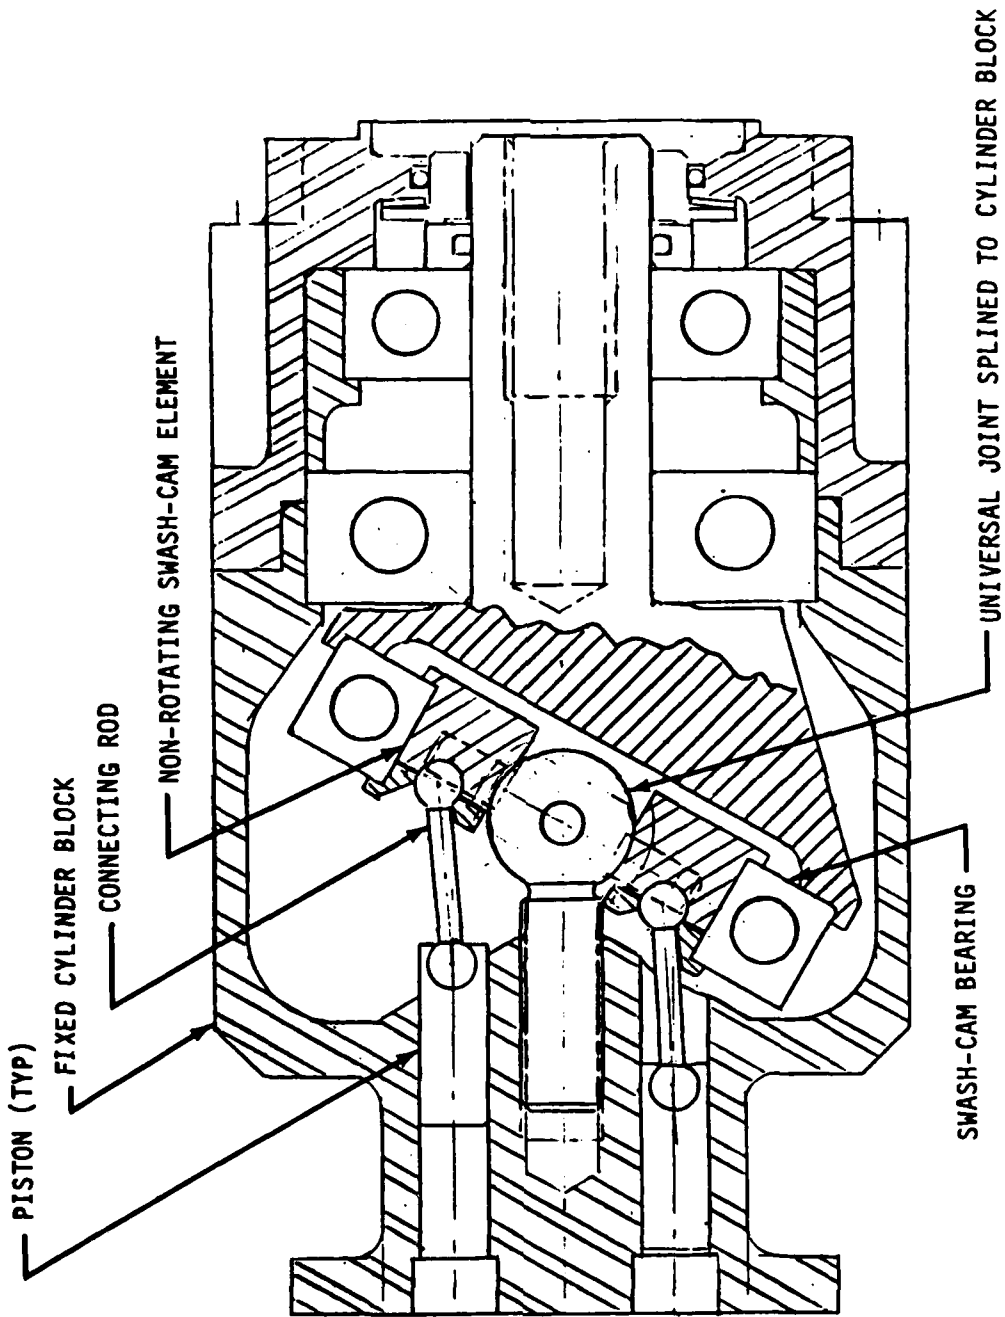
Thirty-degree six-piston hydraulic motor with connecting-rod coupling of pistons
